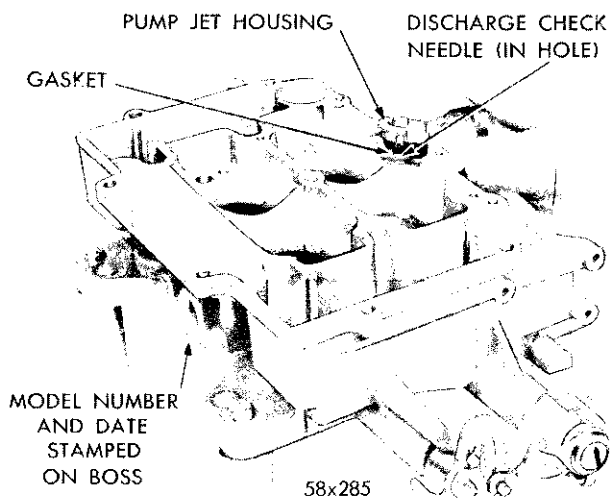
Removing or Installing Accelerator Pump Jet Housing
